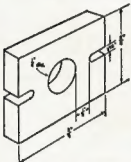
Dimensions of the insulating spacers used to hold bridge wires and outer conductor strips in place.
